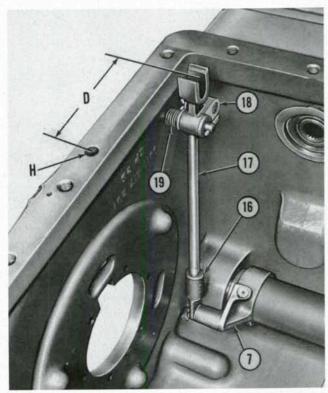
With eccentric pin (19) in "up" position, adjust link (17) by turning link into or out of link end (16) so that distance (D) between center of dowel hole (H) in rear axle center housing to center of draft control lever yoke is 5-5/8 inches (143 mm).
